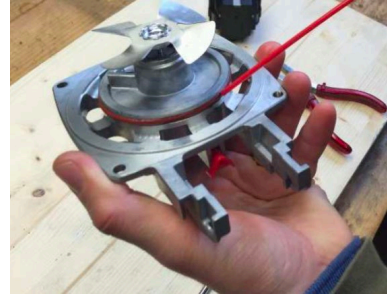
Use snap ring pliers to remove 610048F snap ring and retract driver blade.
